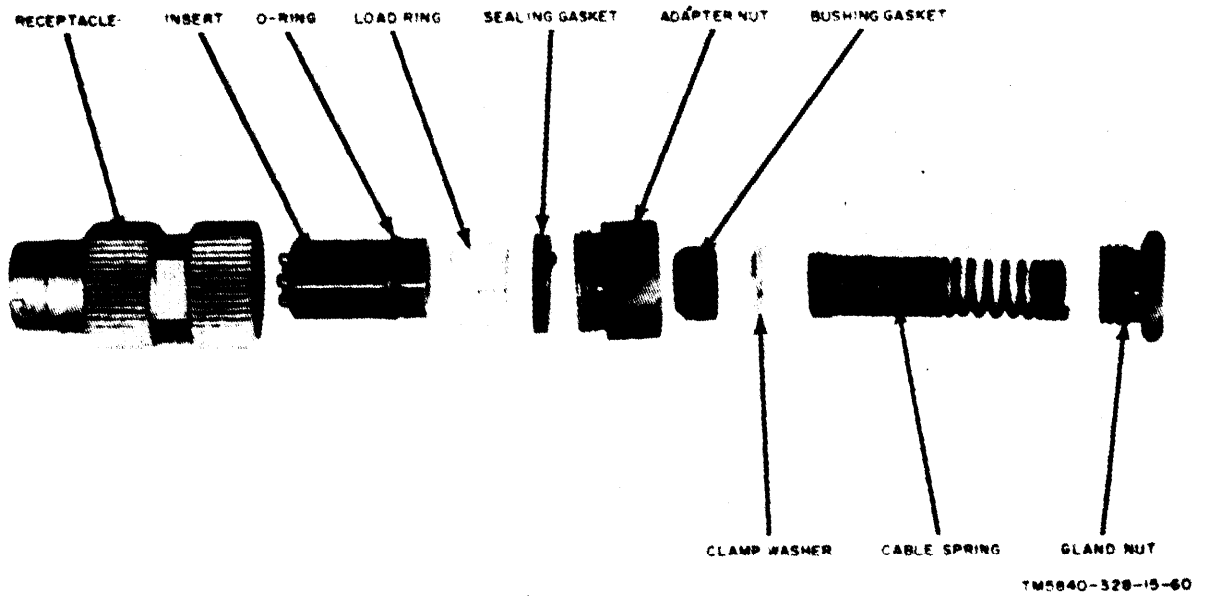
Miniature Audio Connector Assembly U-228/U, exploded view.
